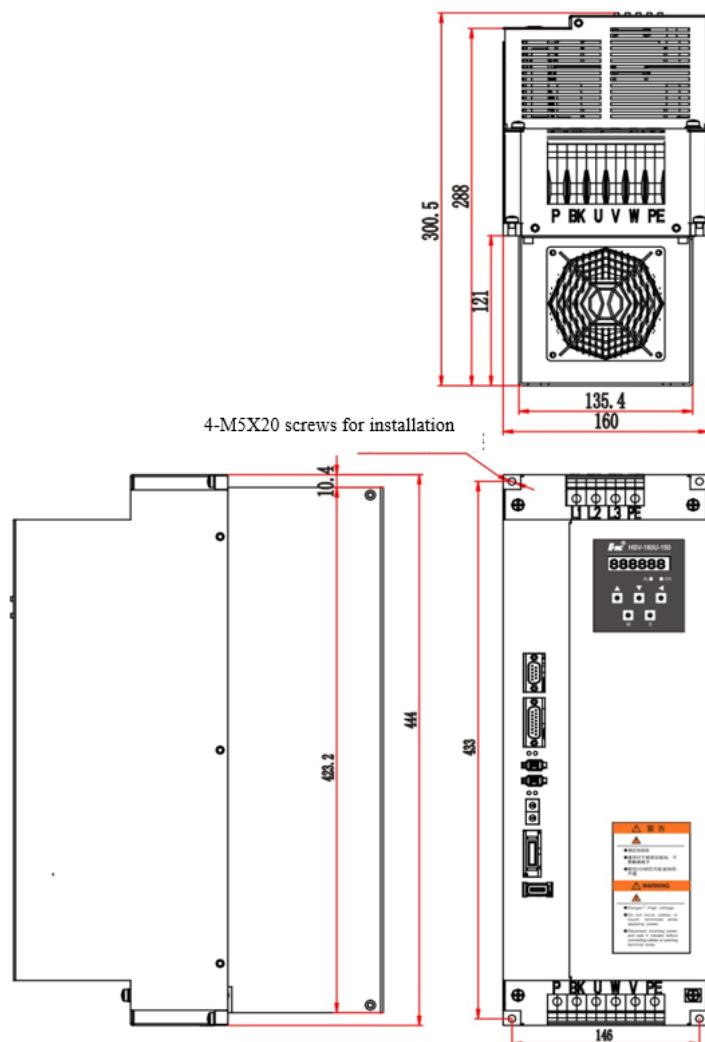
Dimensions of HSV-180US-100, 150 Spindle Drivers
